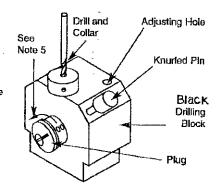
FIGURE B SETTING DRILL DEPTH 3/32* Drift Hold drill firmly in bottom of adjusting Collar hole. Slip on collar, Set push against block, Screw and tighten set screw. Drilling Block
